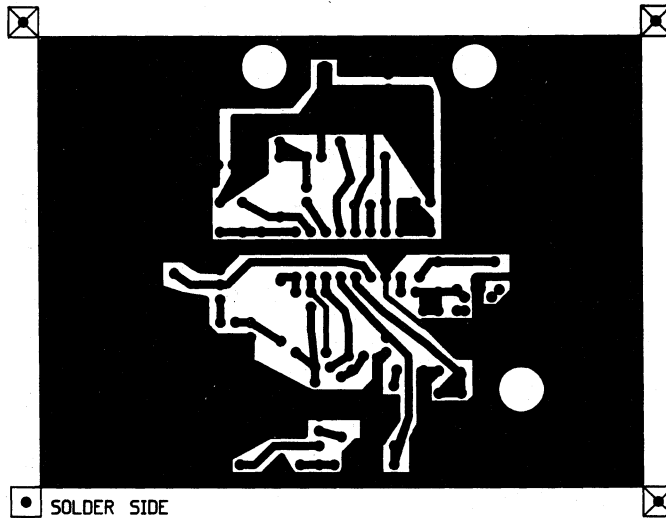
MC3372P PC BOARD CIRCUIT OR SOLDER SIDE AS VIEWED THRU COMPONENT SIDE
